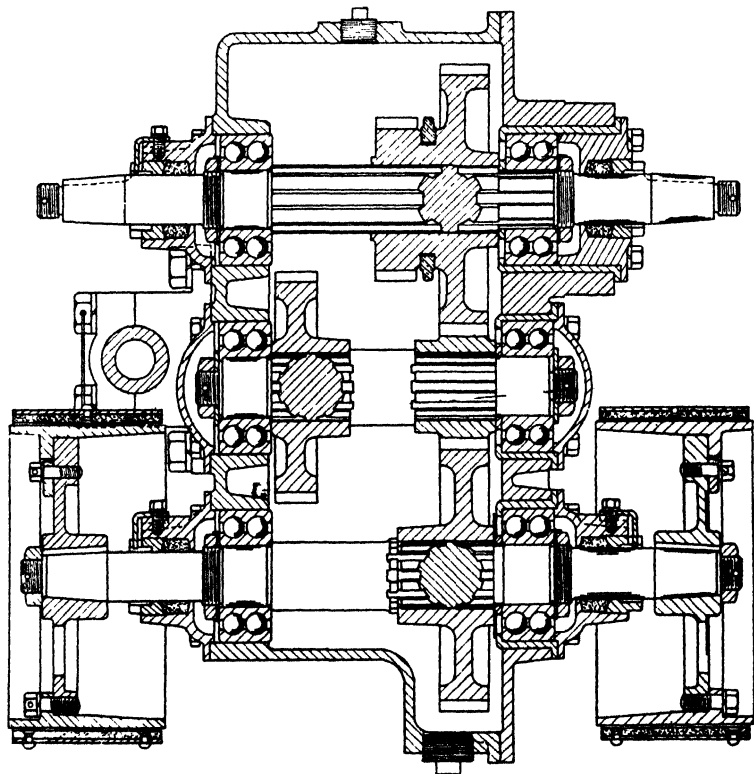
DROP GEAR OF FOUR-WHEEL-DRIVE TRUCK.
